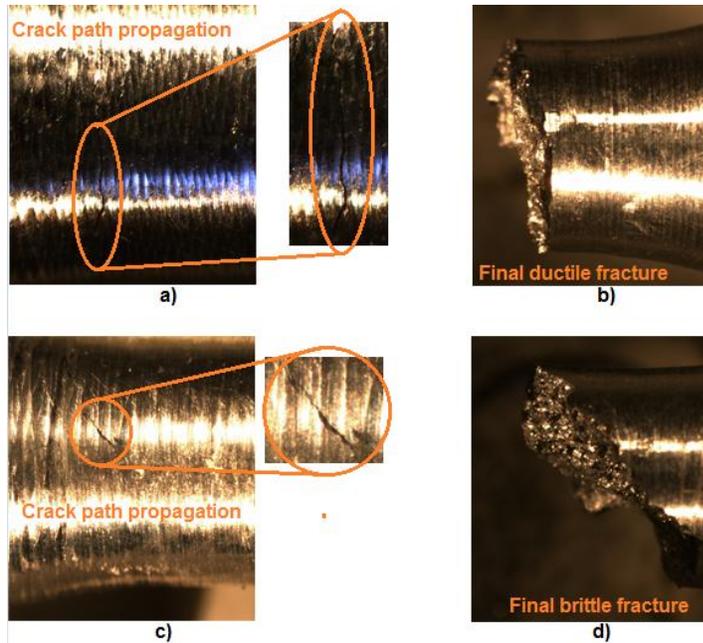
Crack paths for torsion fatigue tests: ductile crack, perpendicular to principal axis of specimen a) b), brittle crack along an angle close to 45° .
